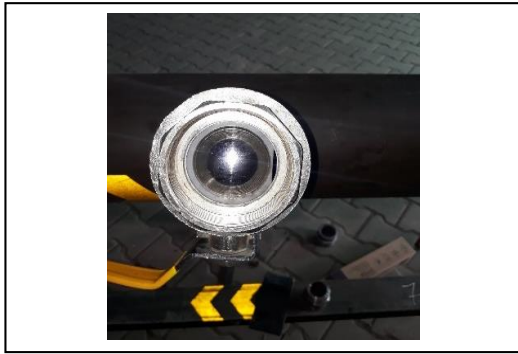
Ball valves for pneumatic brake mechanism for piston
